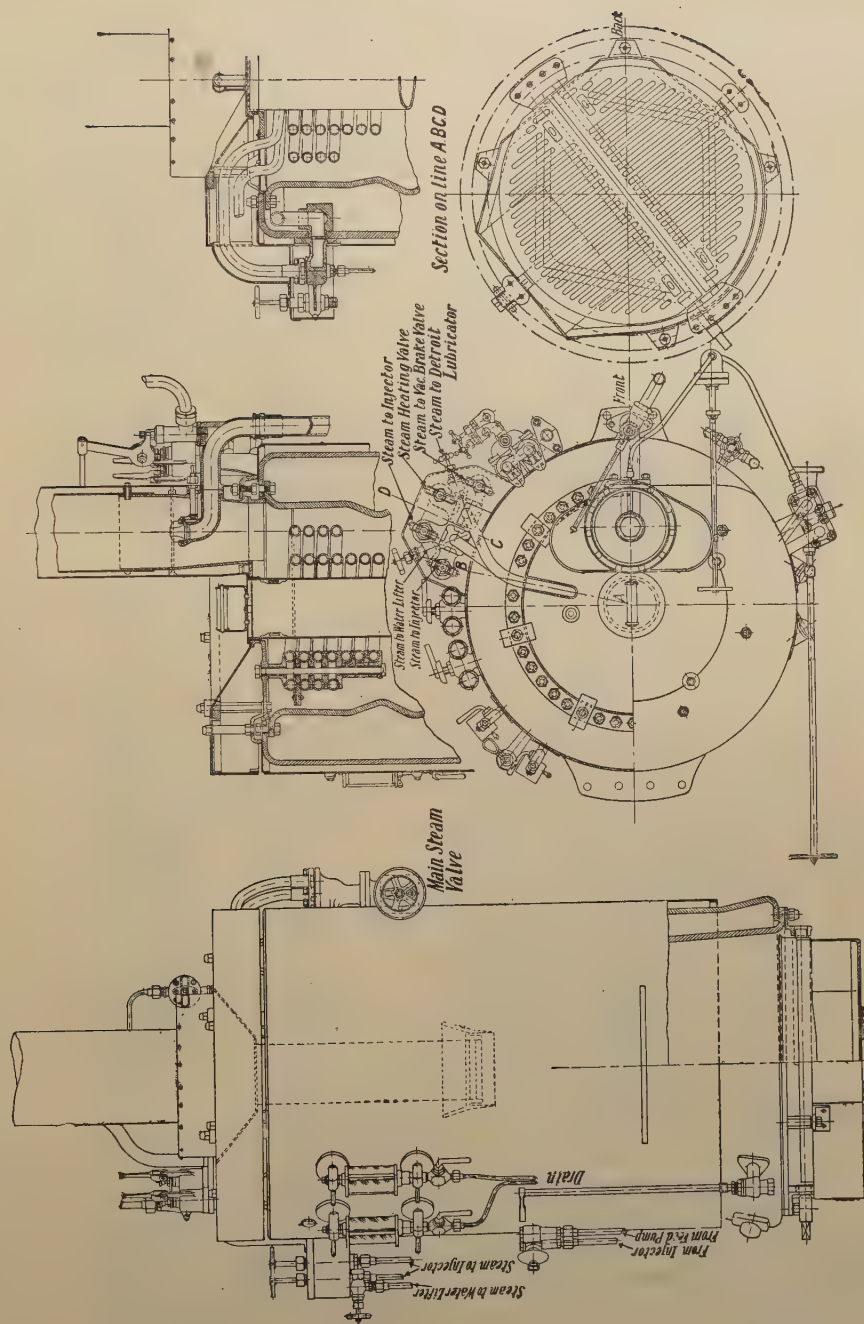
Standard 100 H.P. boiler and fittings, Sentinel Cammell steam rail car.
